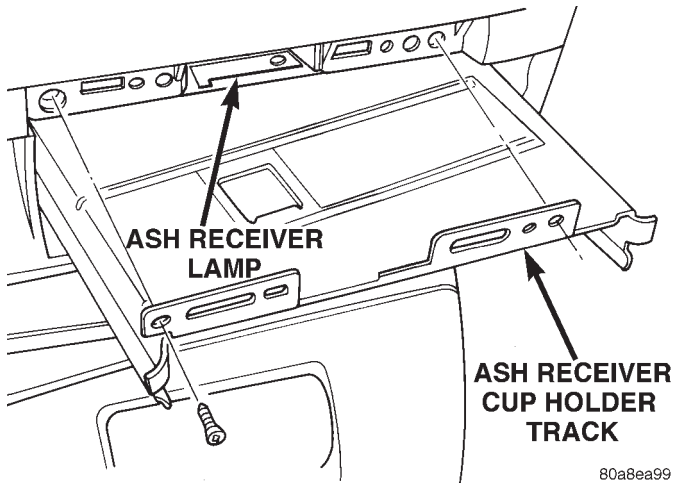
Ash Receiver/Cup Holder Track RHD BODY CONTROL MODULE (BCM)
